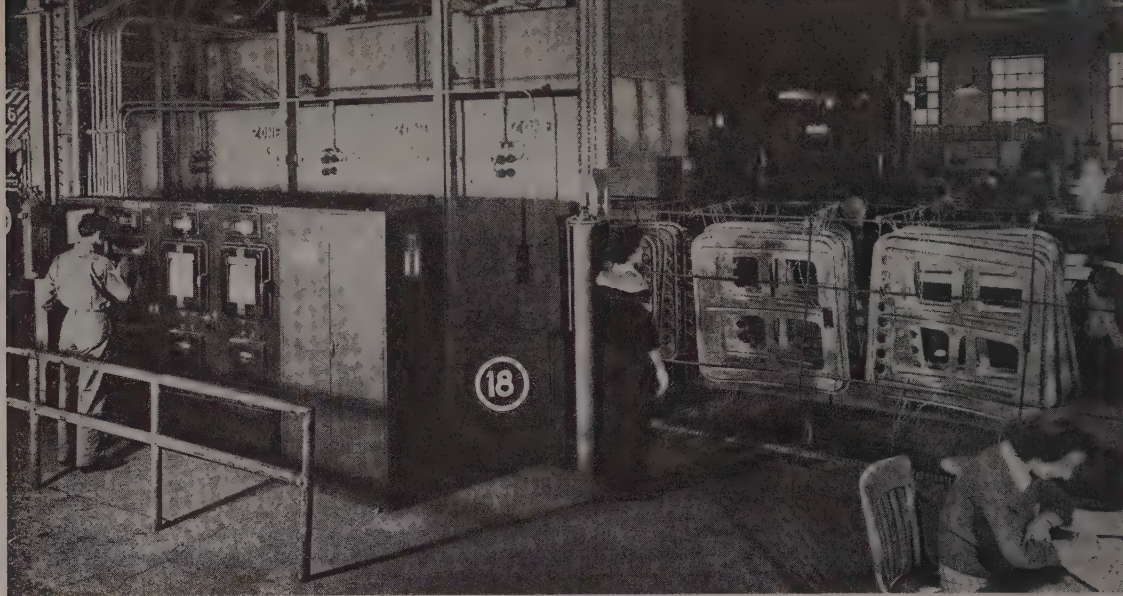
Car type heat-treating furnace handling fabricated parts at Reynolds. Unit employs automatic controls for 3-zone heating
